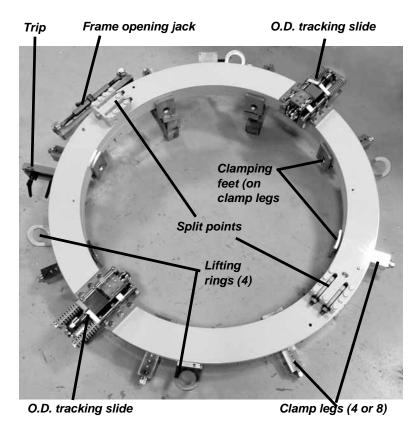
The photo shows the rotating ring side of the heavy duty split frame.
